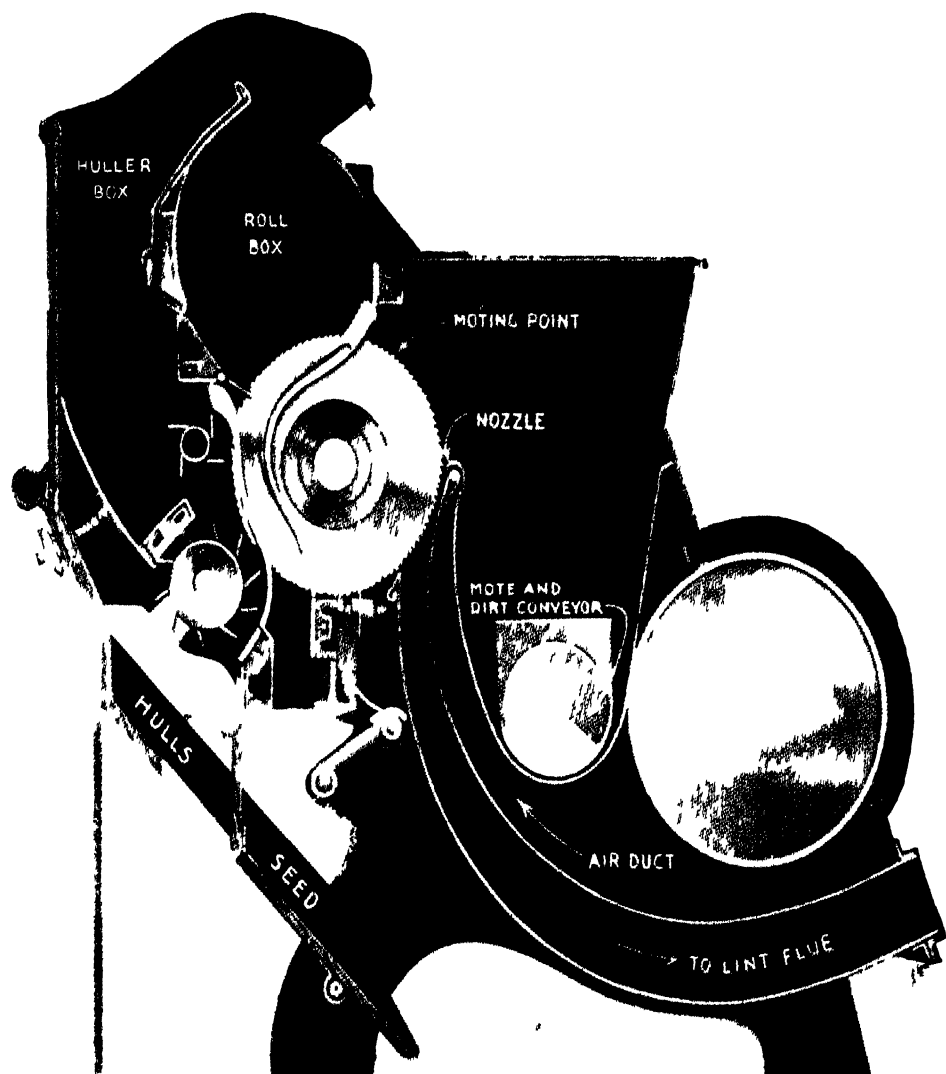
SECTIONAL VIEW OF AN AIR BLAST HULLER GIN.
